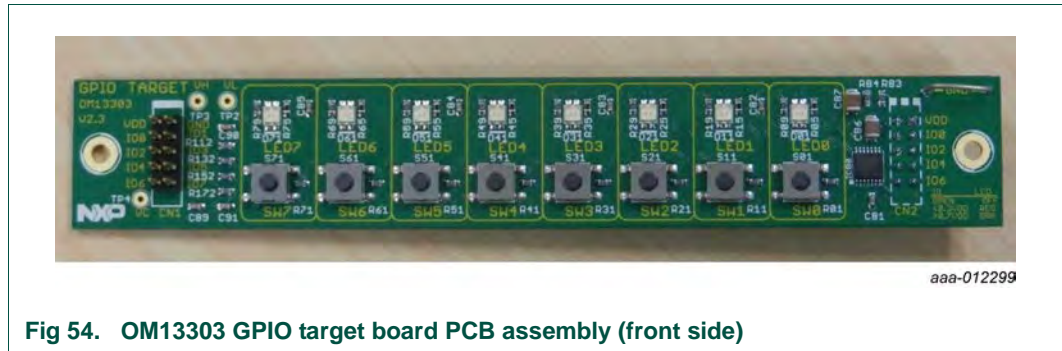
OM13303 GPIO target board PCB assembly (front side)
